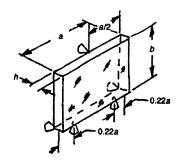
Concept for a kinematic mounting for a rectangular mirror supported on edge. (From Vukobratovich.⁶)
